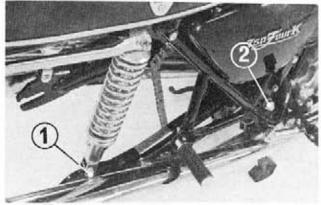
1 10 mm bolt 2 Rear fork pivot nut
